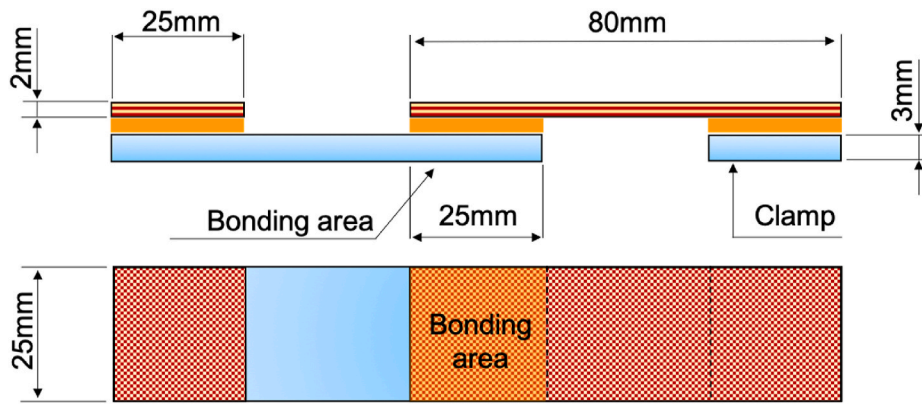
SLS testing specimen dimension of the CFRP/Al joints.
